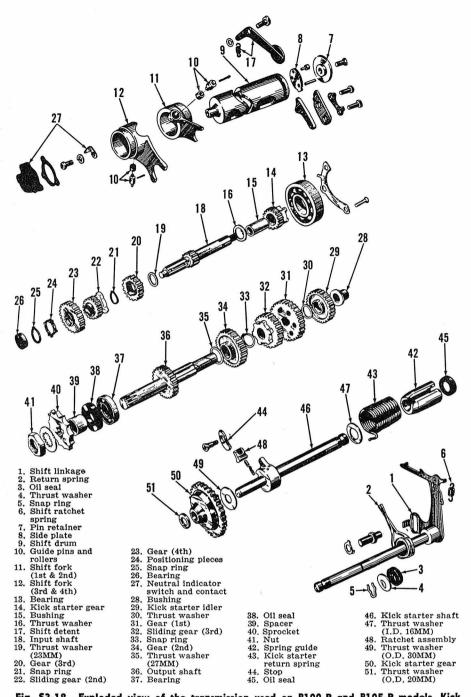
Exploded view of the transmission used on B100-P and B105-P models. Kick starter and shifter assembly are similar on TC120 models.
